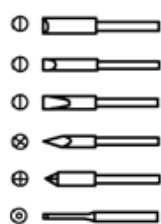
Common Solder Soldering Iron Tip 常用烙铁头
